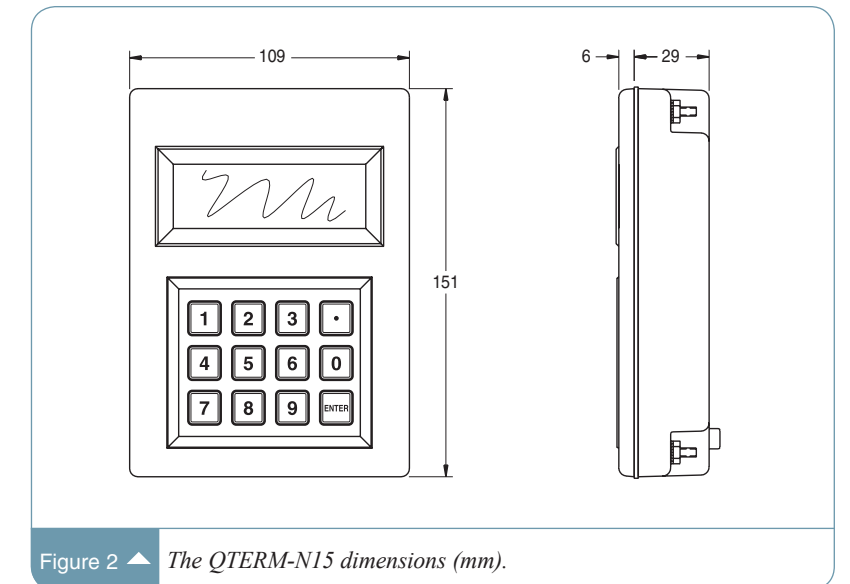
▲ The QTERM-N15 dimensions (mm).
